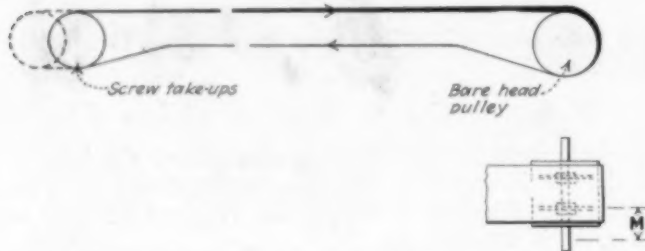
Class I Conveyor, Bare Head Pulley, Screw Take-up
